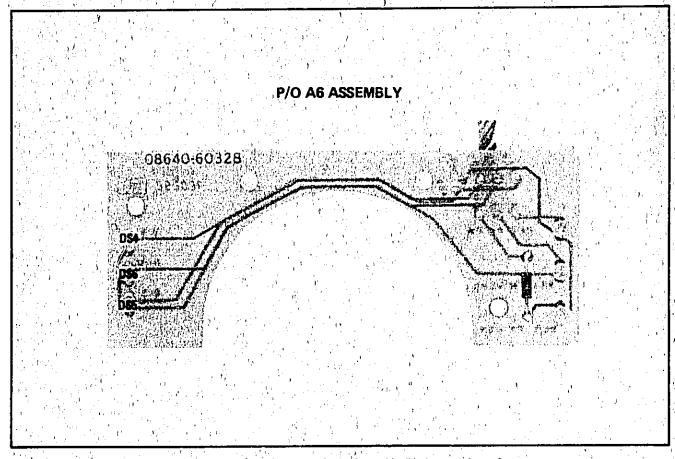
P/O A6 Annunciator Assembly Component Locations
